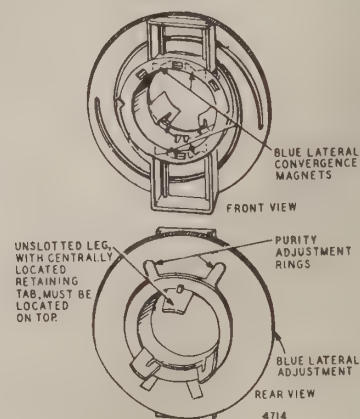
B — Blue Lateral Magnet and Purity Ring Assembly
